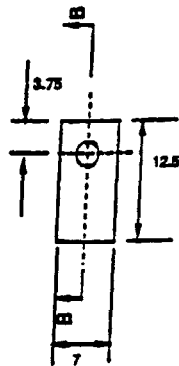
Technical drawing of machined accessory to modify a centrifuge for spin-coating.
